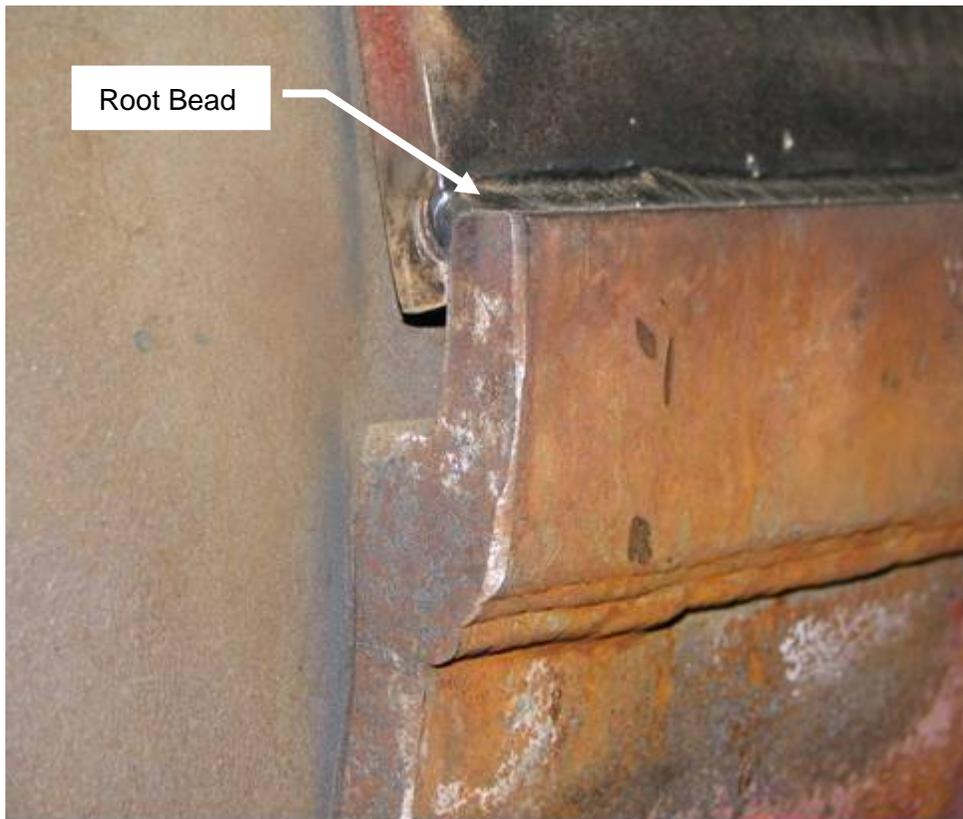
Enlarged View of Reinforcement Sleeve Root Bead
